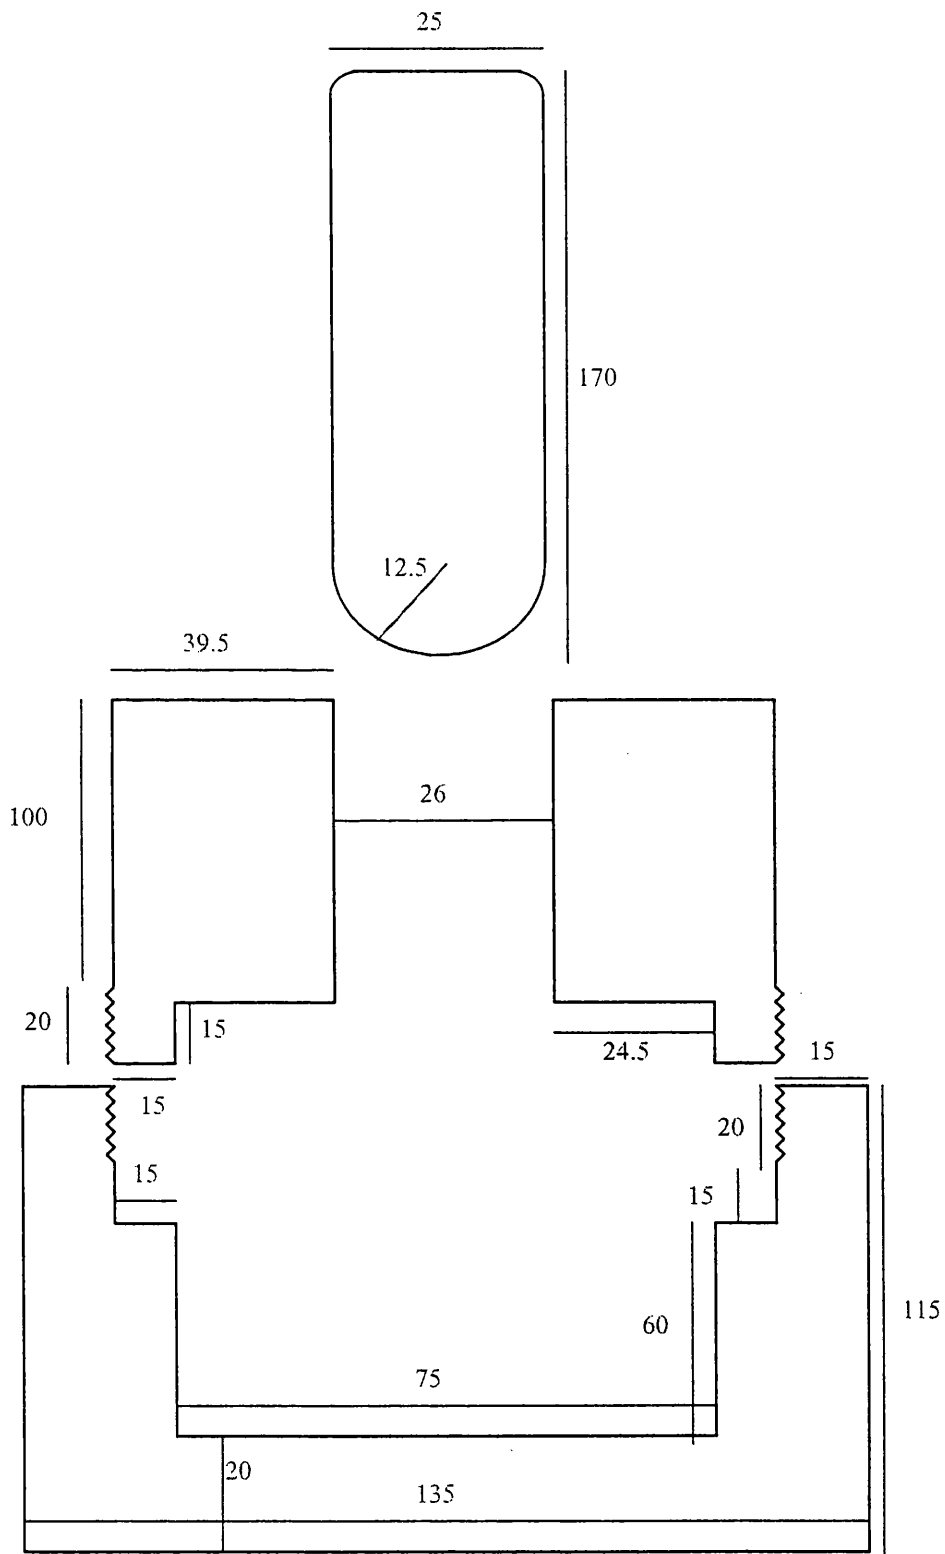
The disk testing apparatus (all dimensions in millimetres)
